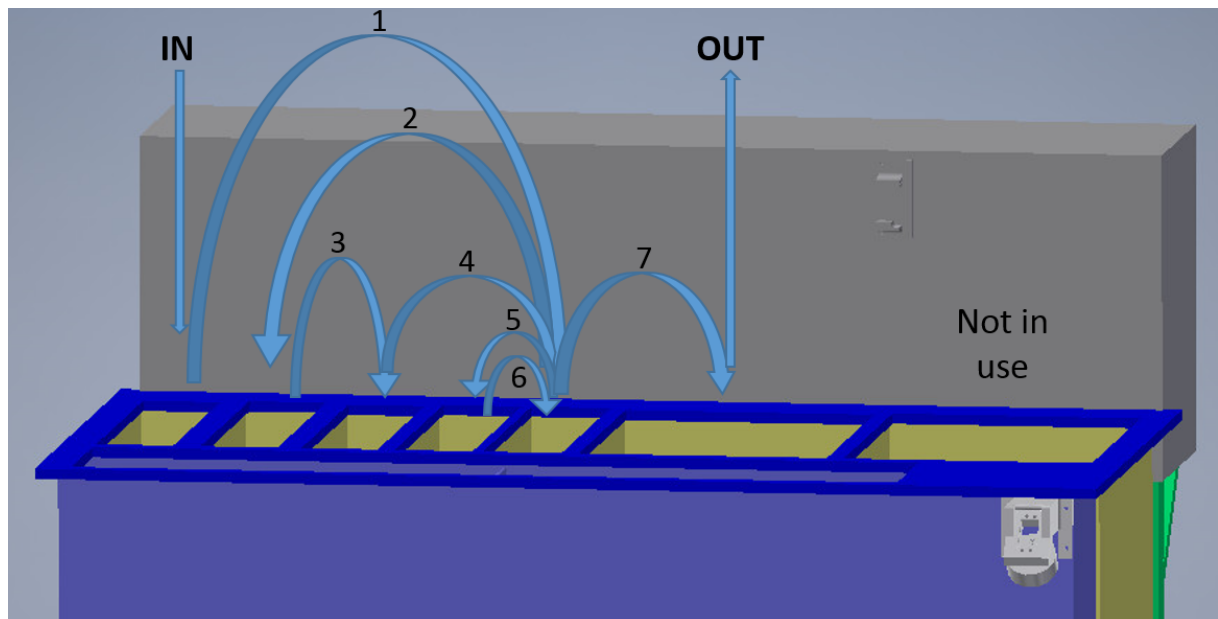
Through hole plating process flow in our machine. The numbers represent the order in which the blank PCB is inserted in the different tanks.
